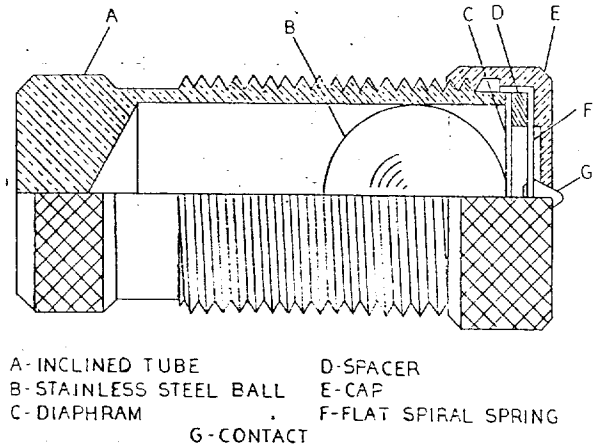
(6077069-4) Cut-a-way View of Contact Assembly
